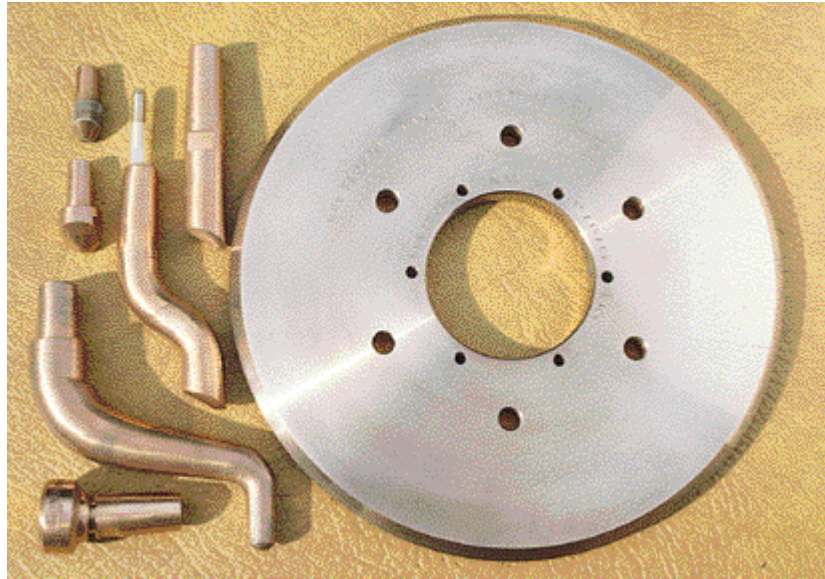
Spot welding electrodes (Delta Enfield Metals Ltd)
